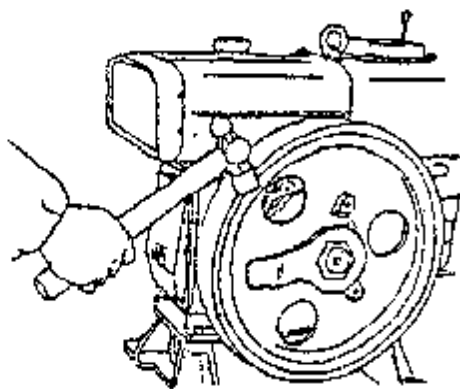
Loosening the flywheel nut by knocking the handle of the wrench with a hammer.
